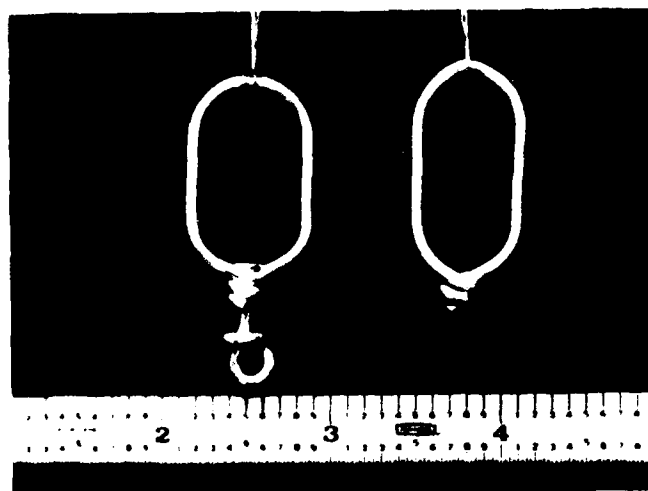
Photograph of Test Swivel Assembly (left) and Failed Swivel Assembly.
